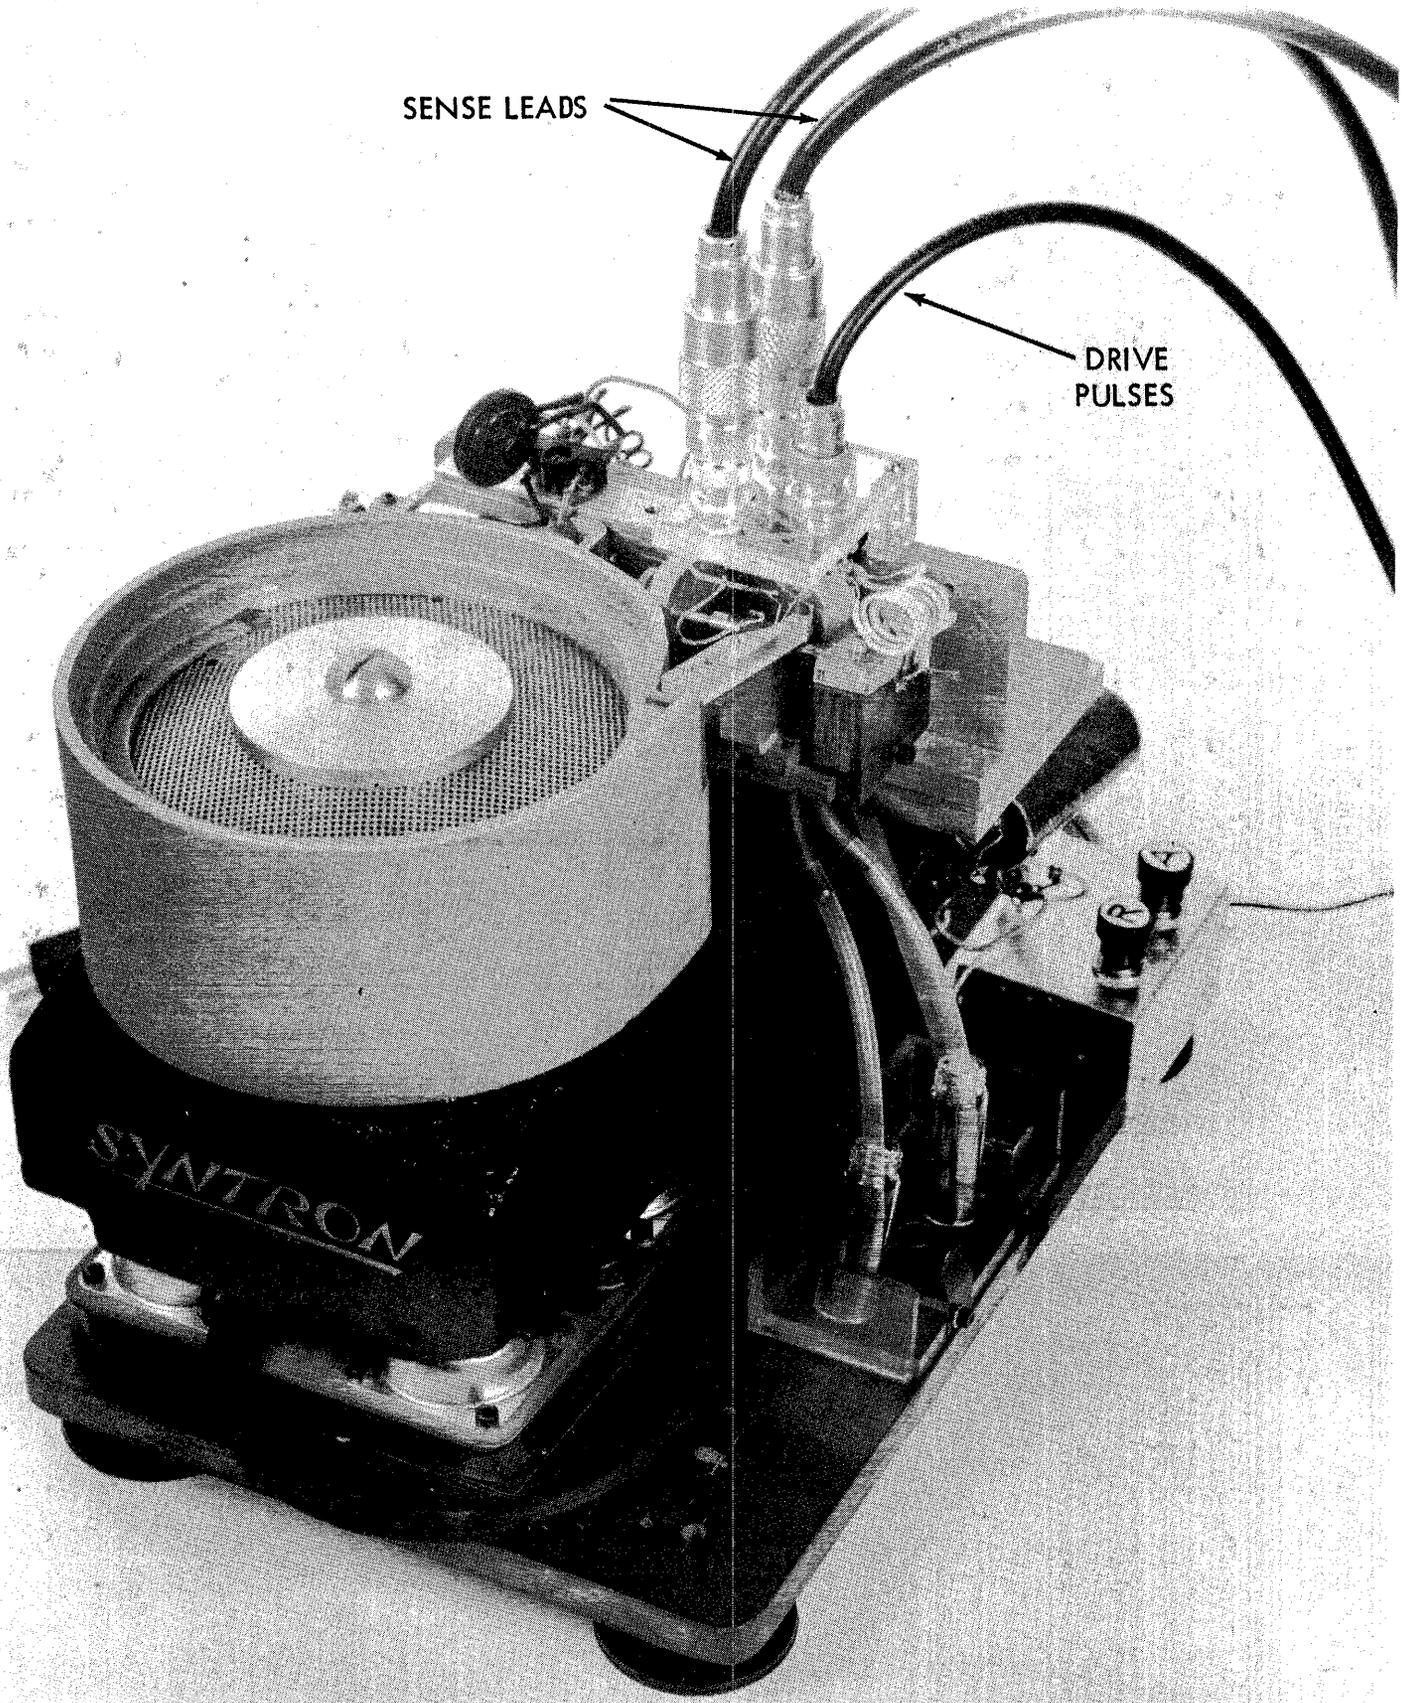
AUTOMATIC 3-HOLE CORE HANDLER
